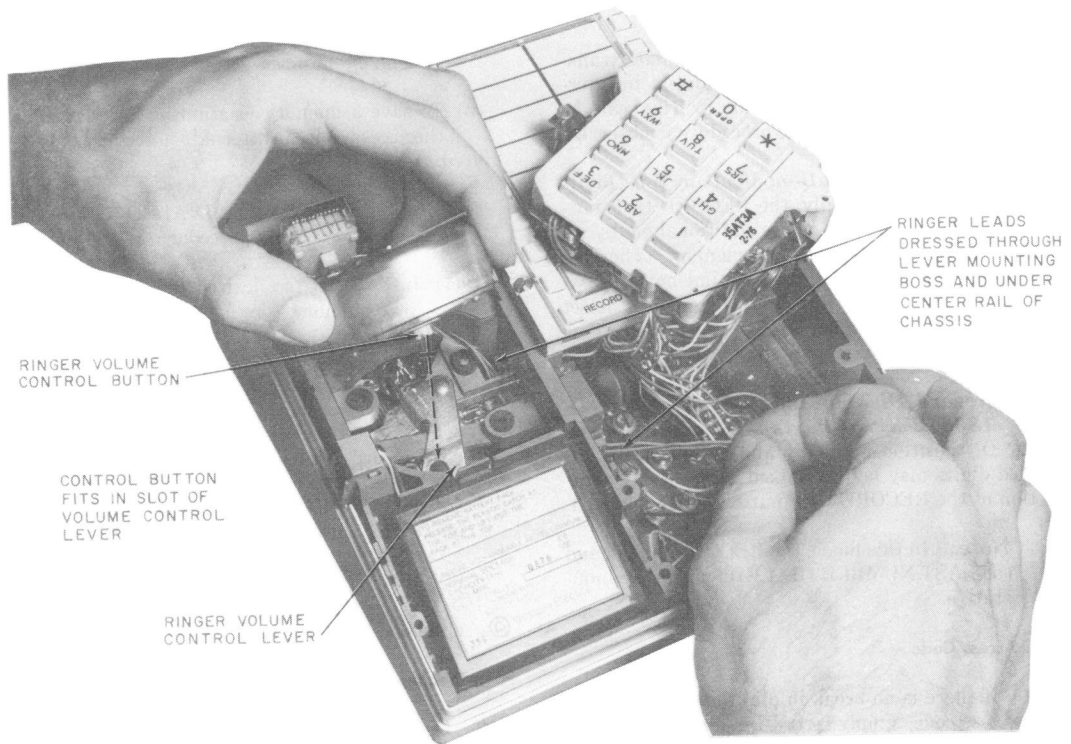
Ringer Being Installed in 2960A01M Chassis With Dial Rotated Onto Memory and Shield Removed
